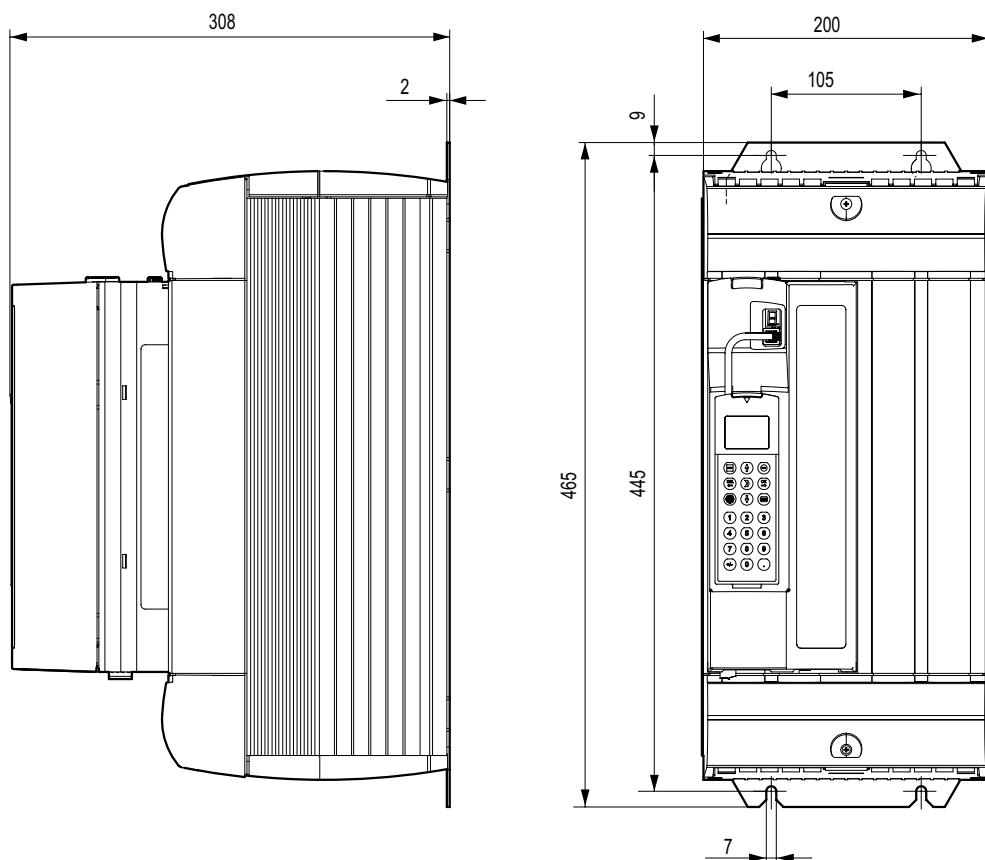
Dimension drawing for MDX61B size 3, dimensions in mm
